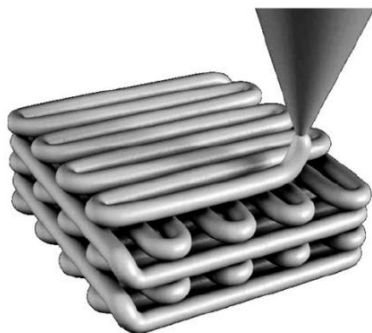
The deposition of a meander scaffold using dispensing valve [336]. Reused with permission from Springer.
